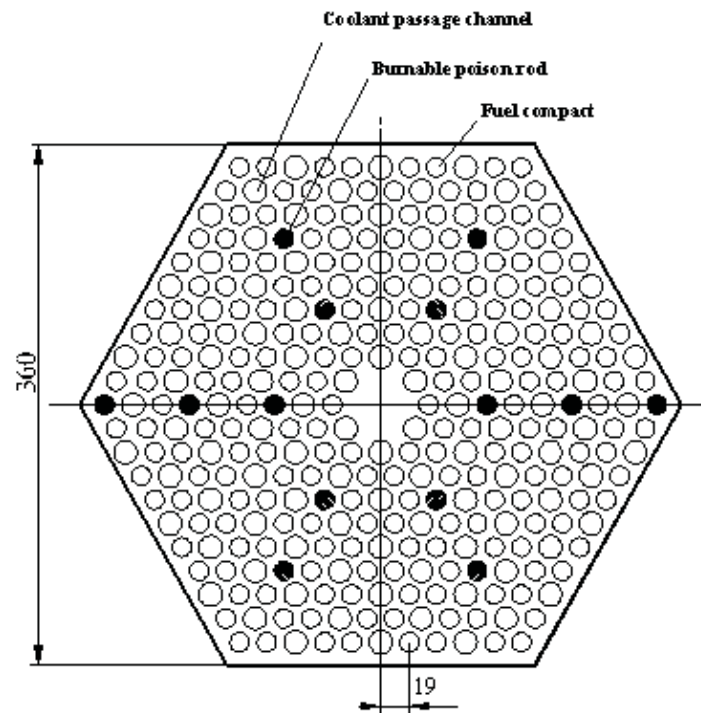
Fuel block cell, type 1 fuel assembly.
